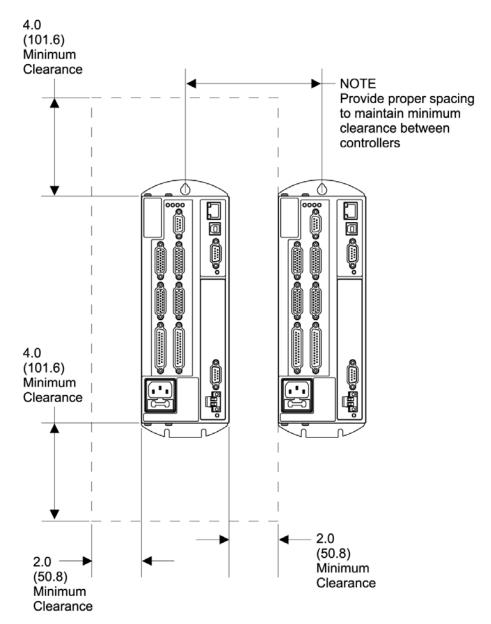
Mounting Clearance for ACR9000 and ACR9030 2/4 Axis Configuration
